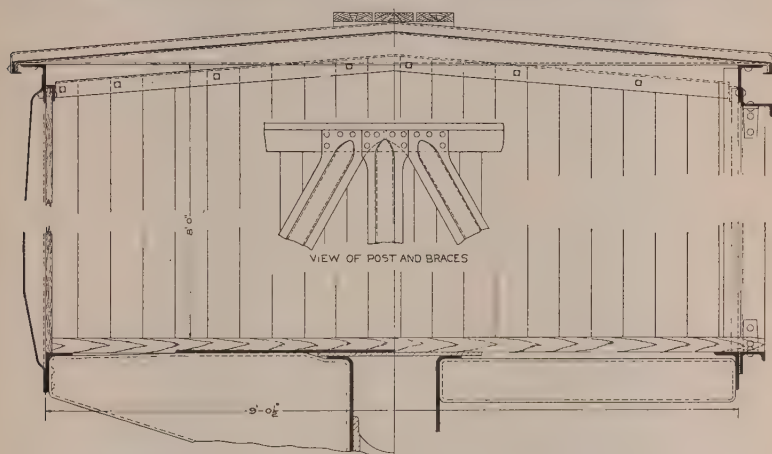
Cross Section of Pressed Steel Frame Box Car.
